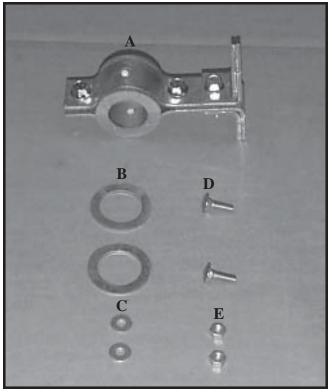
Hanger bearing assembly and auger hardware, sizes listed below.
